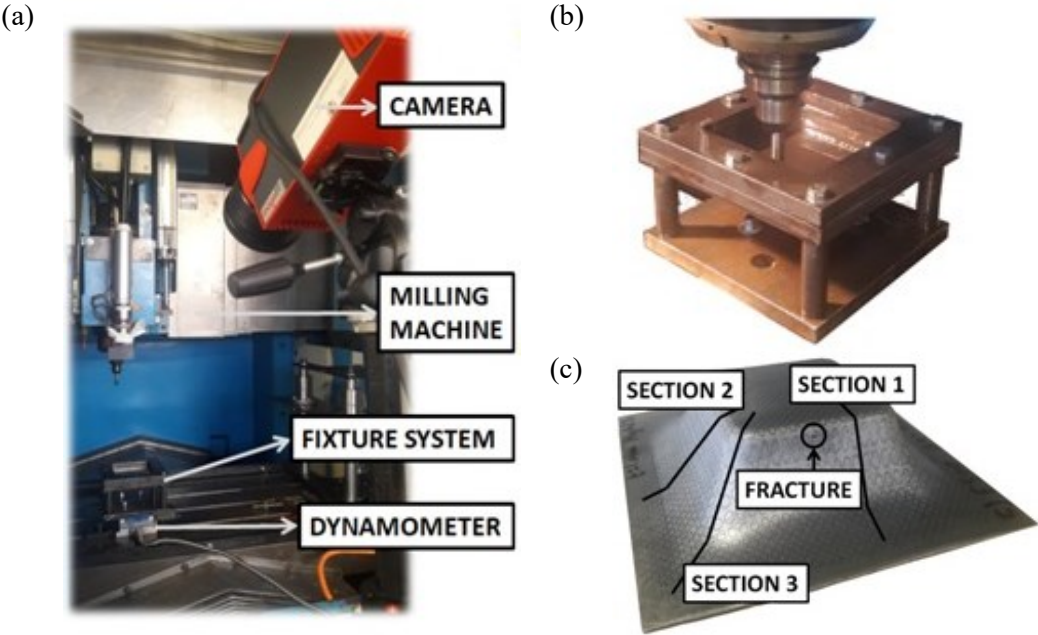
(a) SPIF Experimental Set-up; (b) Fixture system; (c) Sections for strain measurements
